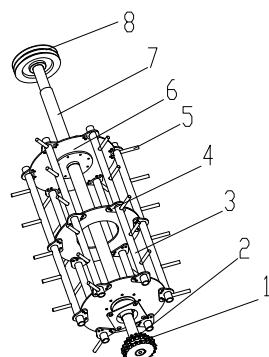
Structure diagram of tangential cylinder: 1. Double row sprocket; 2. Sprocket; 3. Toothed rod; 4. Toothed rod connector; 5. Spike tooth; 6. Toothed rod mounting disc; 7. Transmission shaft; 8. Pulley.
